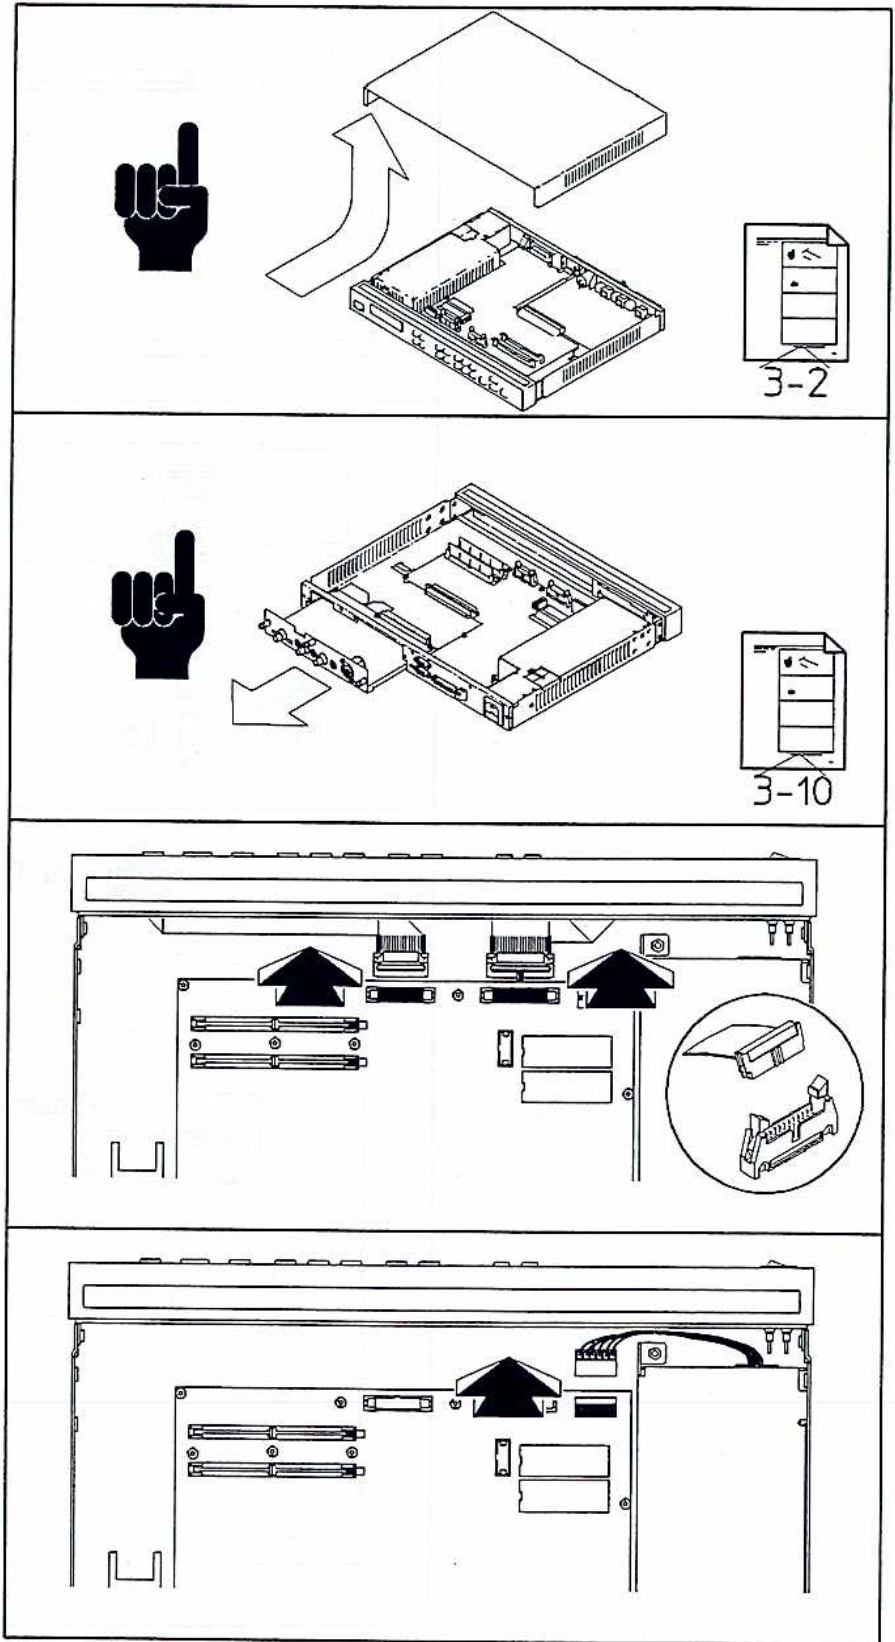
Microprocessor Board Removal (HP VidJet Pro; 1 of 3)
